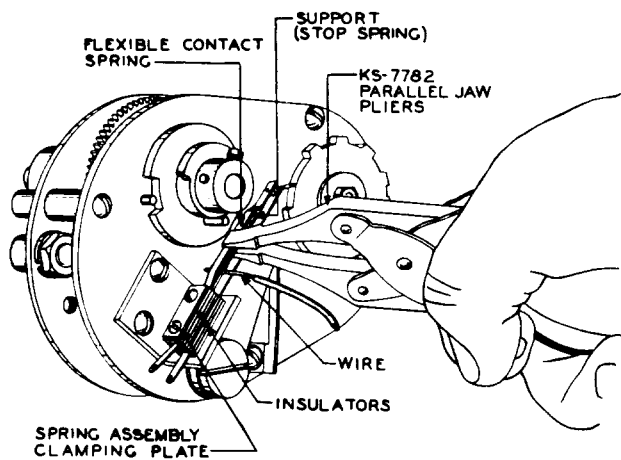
Method of Adjusting the Flexible Contact Spring
